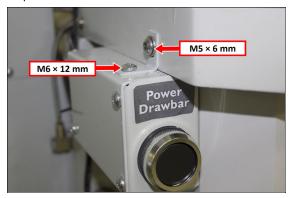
Bracket installed on the Power Drawbar button box and the mill head.
